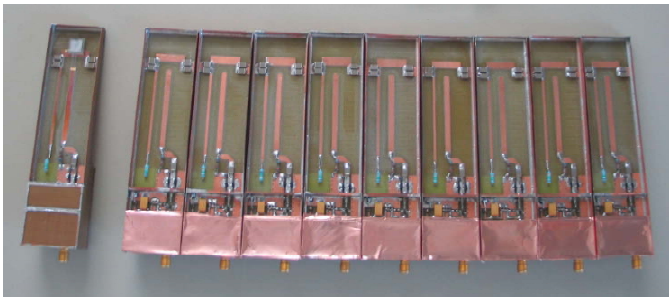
Ten BCM modules, one with mounted diamond detectors, ready for final assembly at CERN
